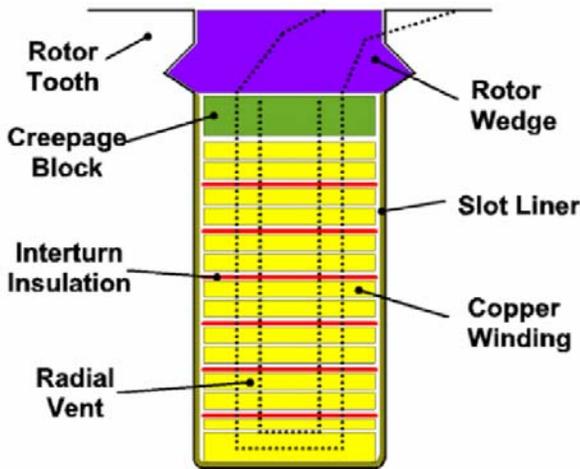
Cross-section of a cylindrical rotor slot showing the winding conductors and insulation
